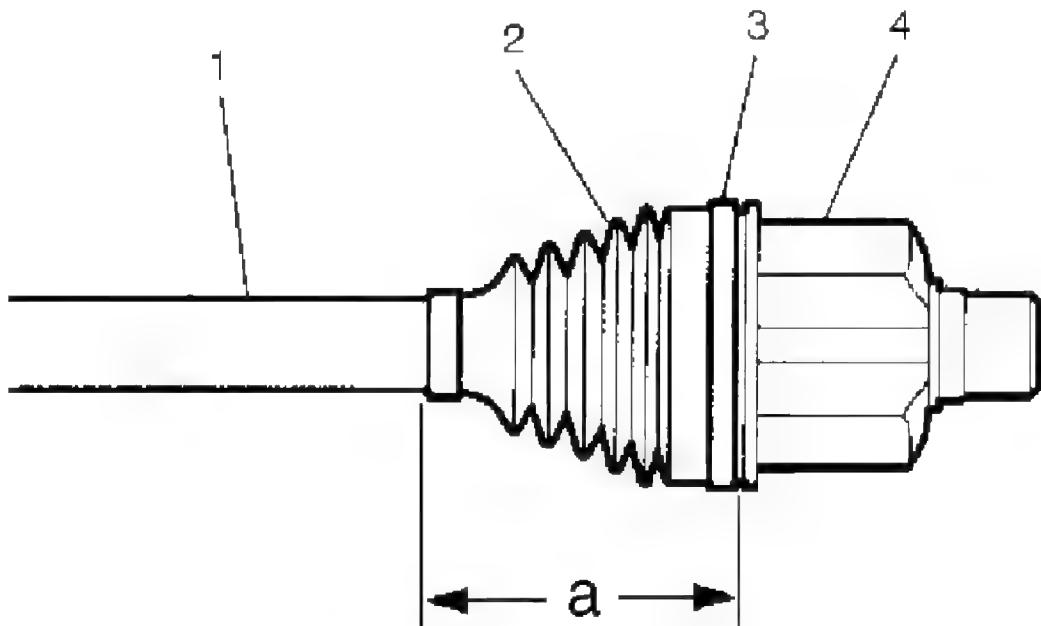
Identifying Axle Shaft/CV Joint Assembly Components And Installed Boot Measurement Dimension
